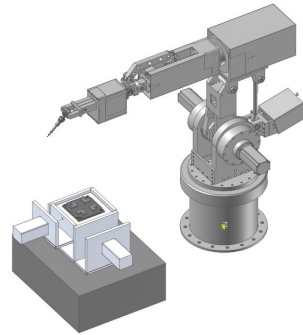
Welding preparation stages of RS2 and 2-axis additional axes in RecurDyn®
